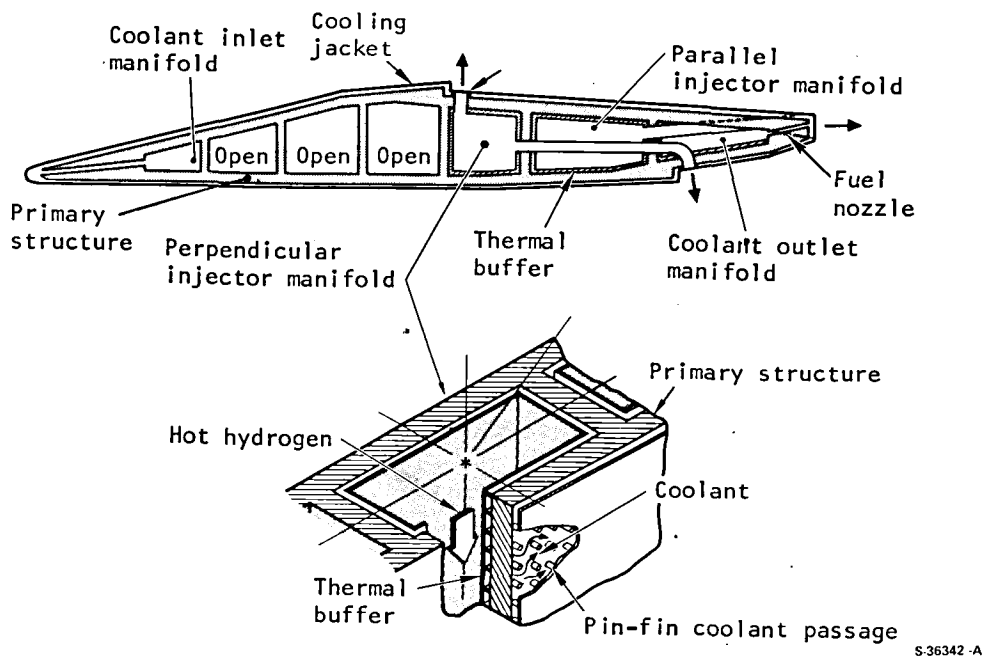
Cross-sectional sketch of side strut and TPS wall structure.
